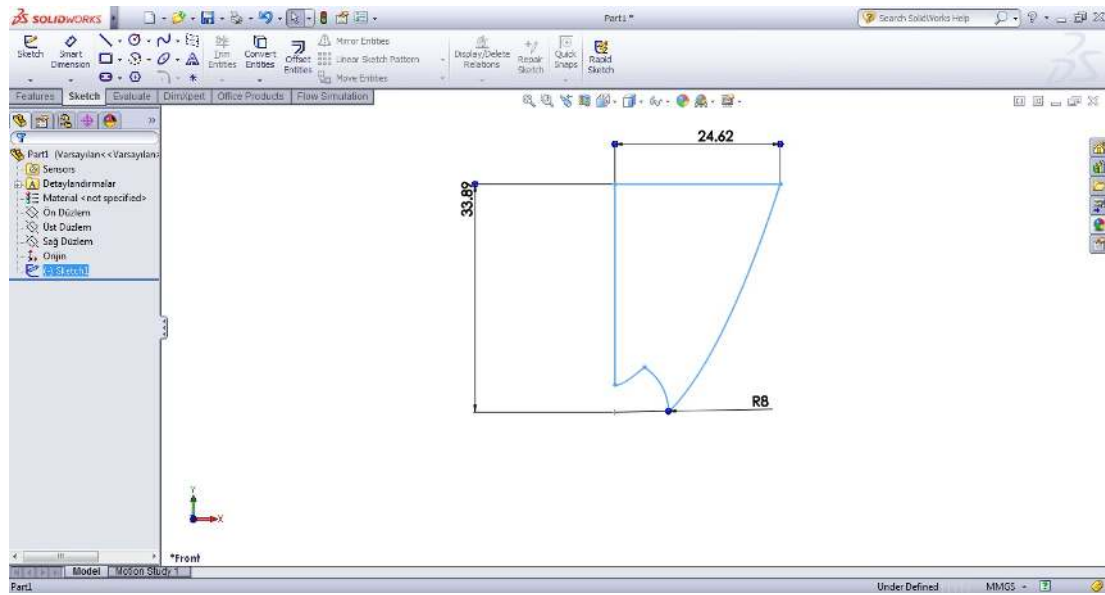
Final 2D lens. Measurement unit is millimeters.
